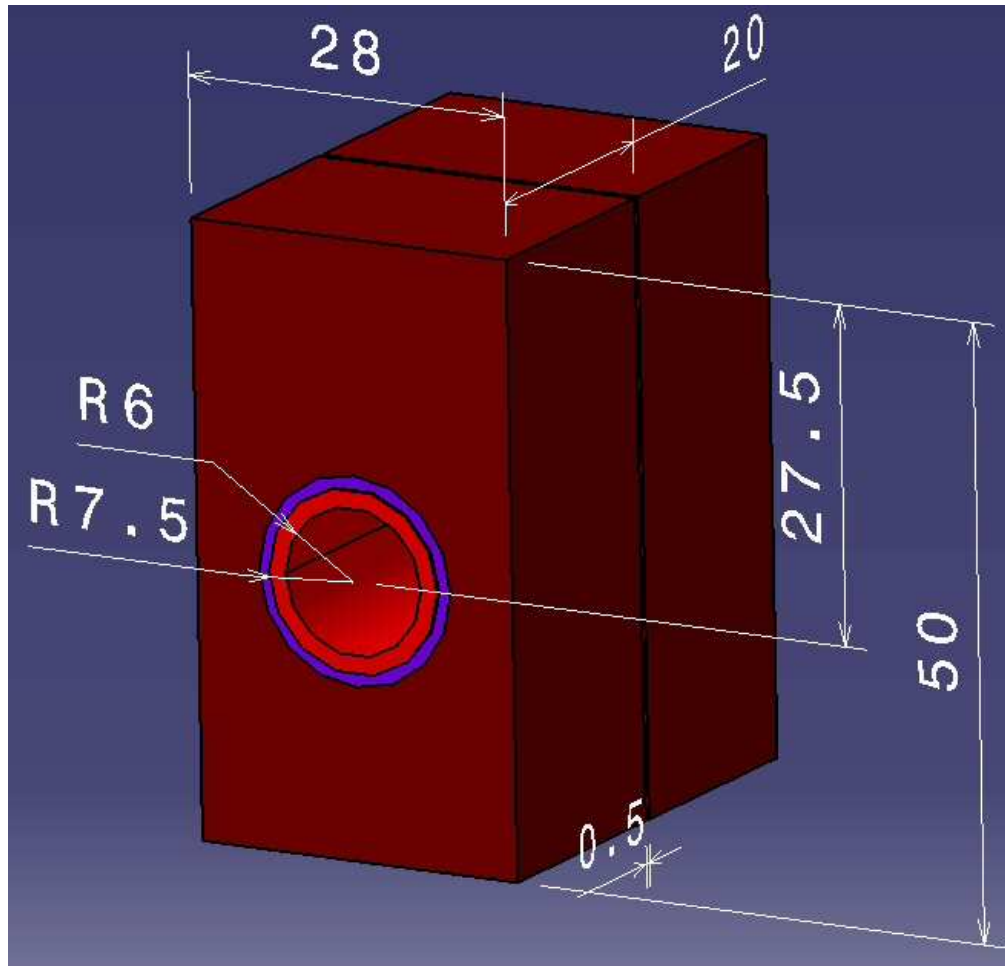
The dimension of the monoblock [mm].
